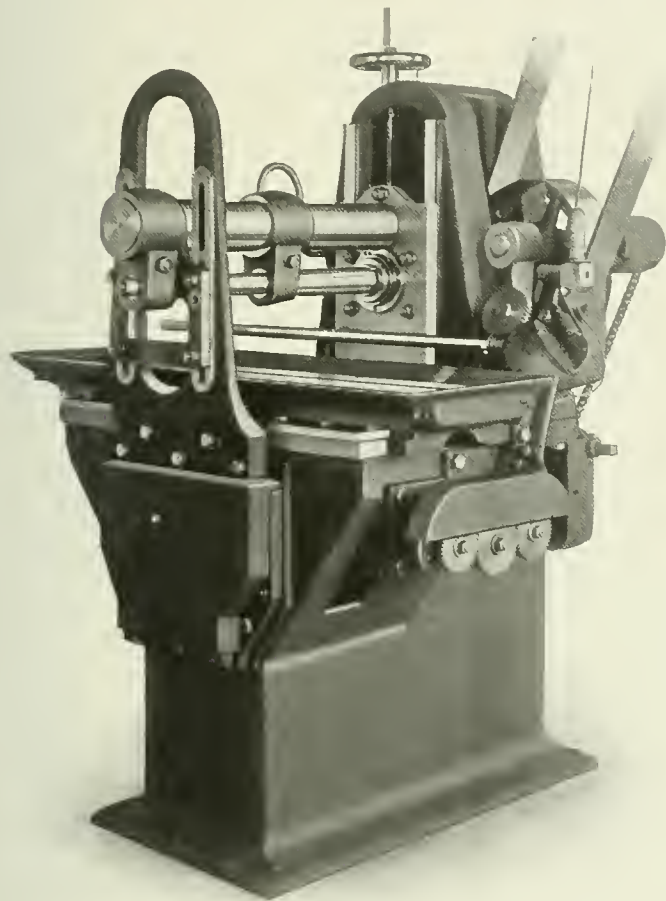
No. 9 Automatic Index Milling Machine built by the Garvin Machine Co.
